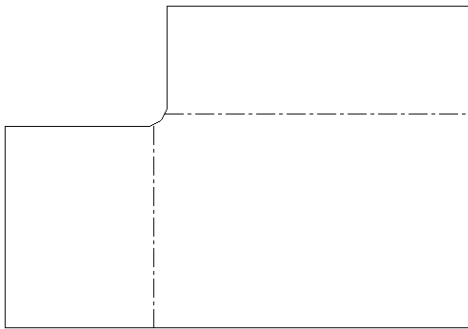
Flat pattern with the Merge faces check box selected
